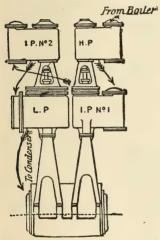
Tandem Quadruple Expansion Marine Engine Showing Arrangement of Cylinders.
